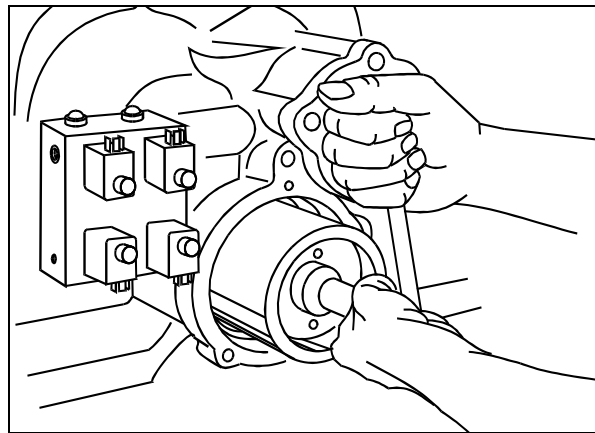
Loosening or tightening the grooved nut (127) using tool T 6
